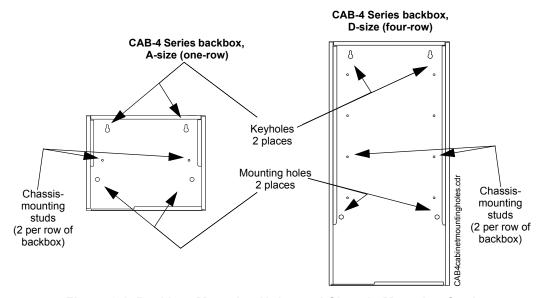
Backbox-Mounting Holes and Chassis-Mounting Studs
